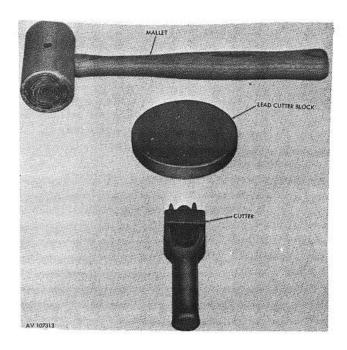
Lift-the-dot snap fastener fabric cutting tools, typical.
